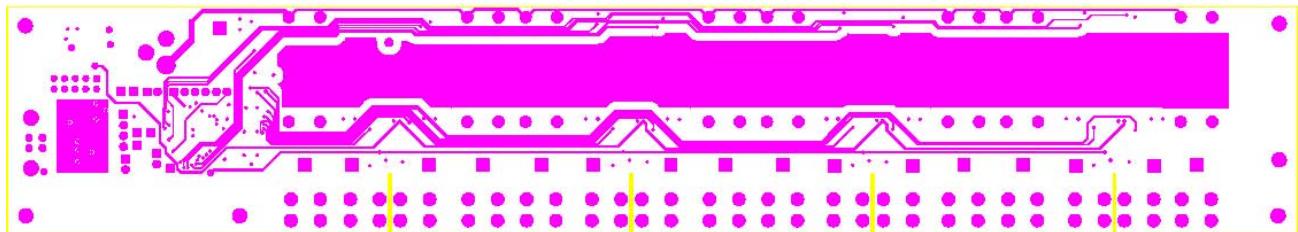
78M6618 PDU1 Evaluation Board PCB Power View
